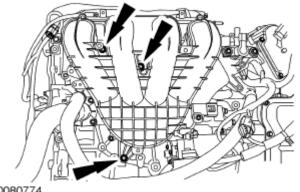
Locating Stud Bolts, Fuel Rail And Fuel Injectors Courtesy of FORD MOTOR CO.
